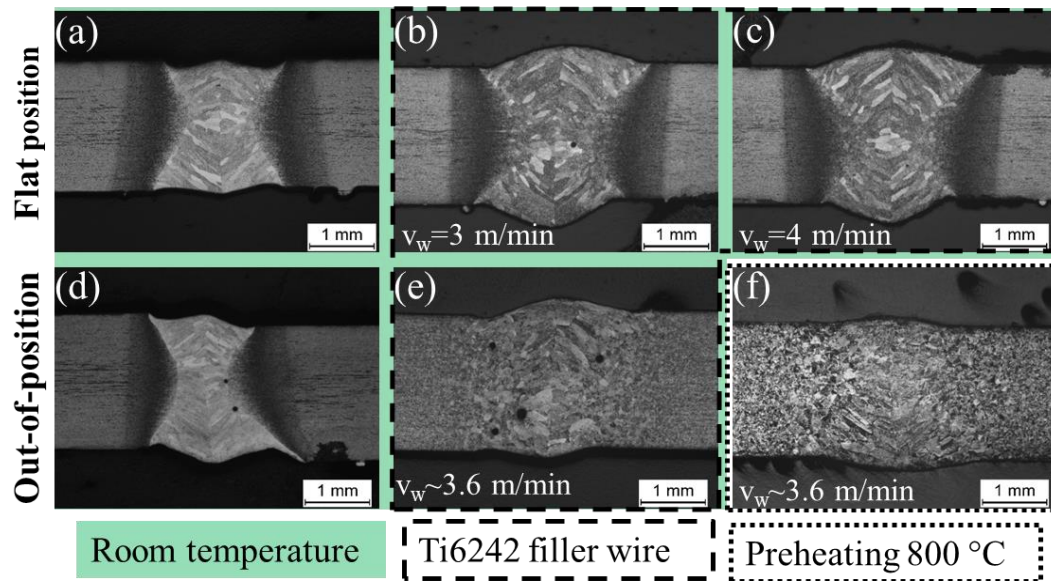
Influence of welding position and Ti6242 filler wire on cross-sections of similar Ti6242 joints welded with $P=4.5$ kW, $v=3$ m/min.
